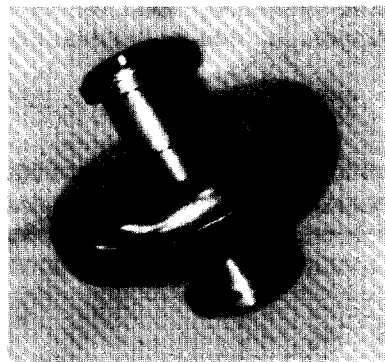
A photo of the fabricated single cell cavity by YAG laser welding.
